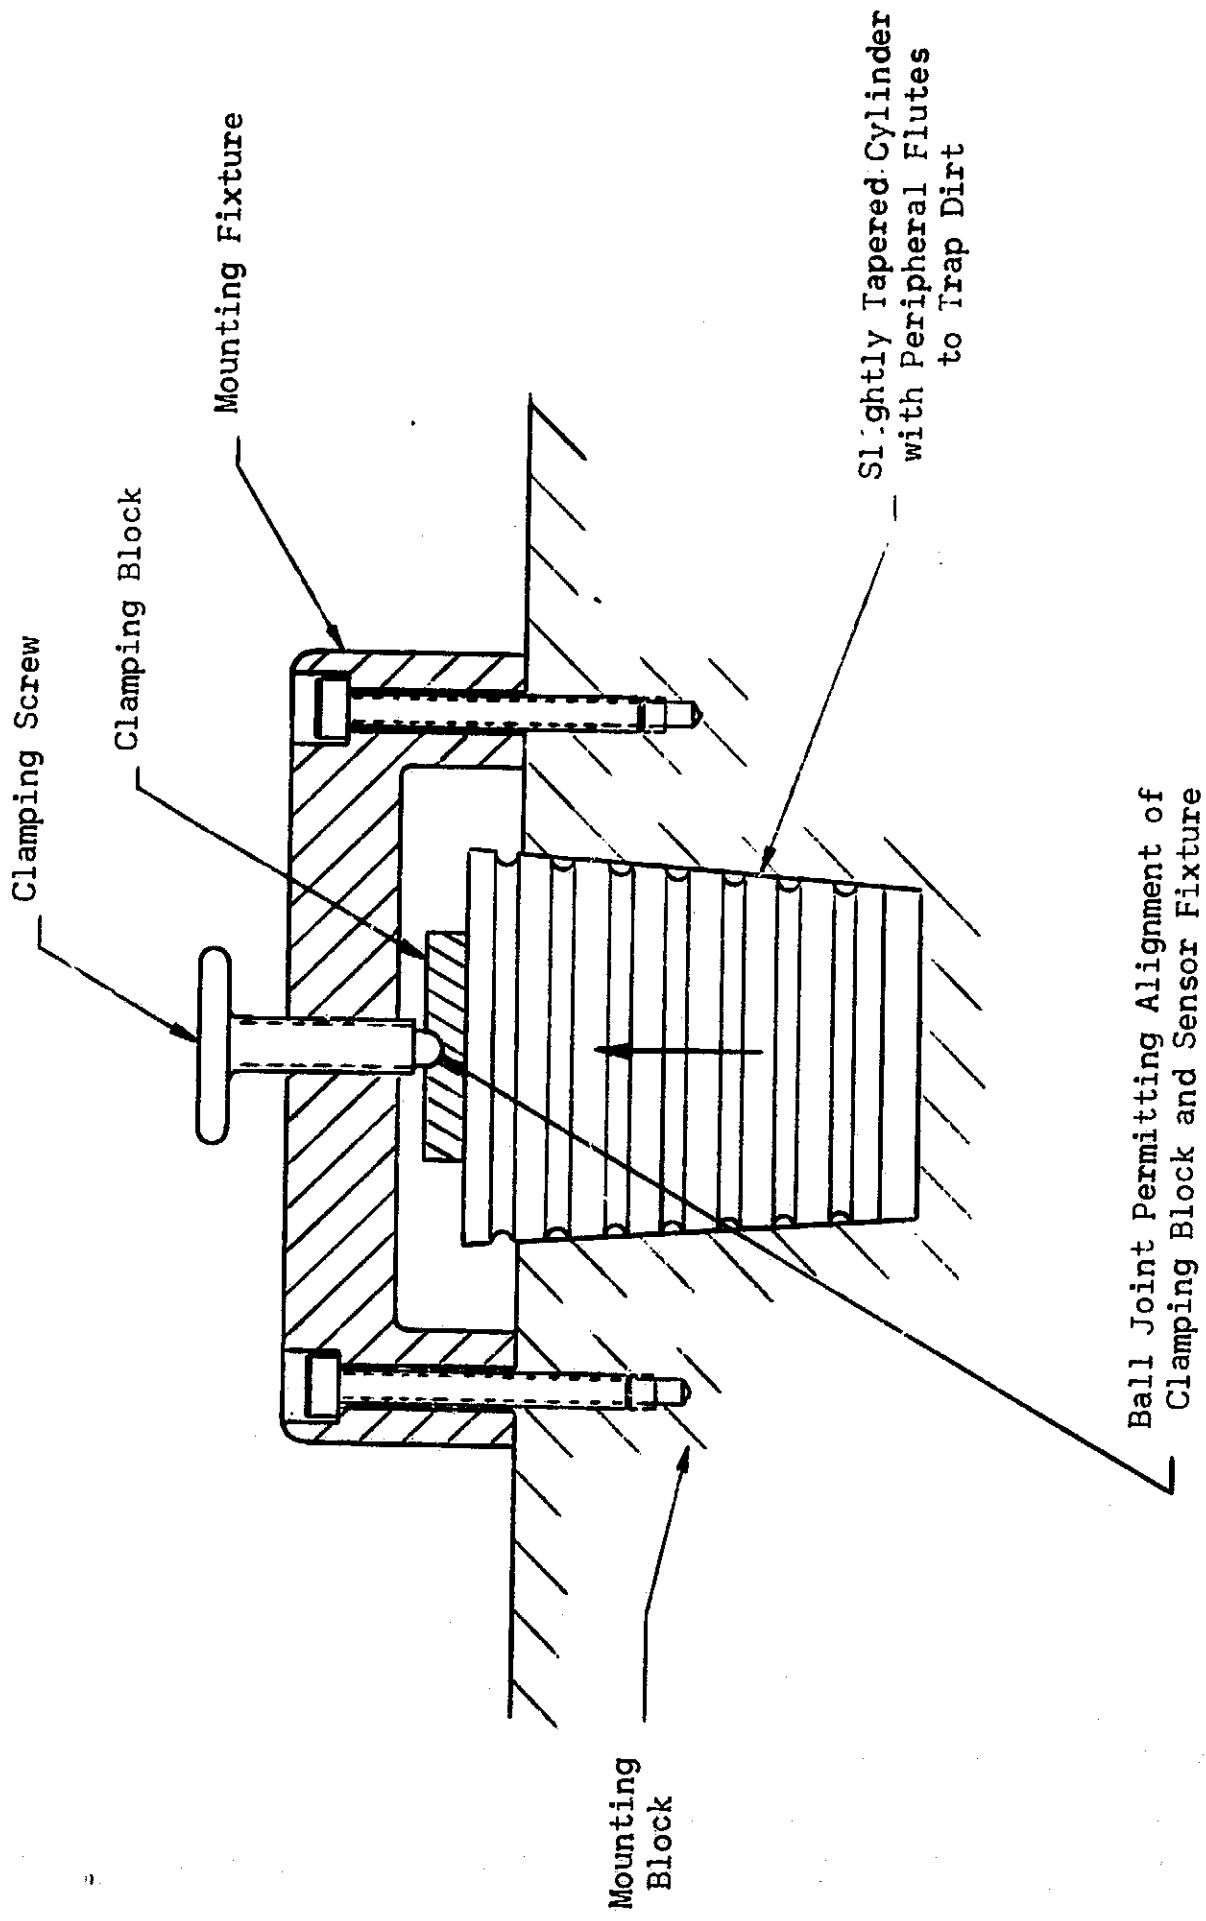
Fixed Clamp Using Cone-in-Tapered Hole Geometry
